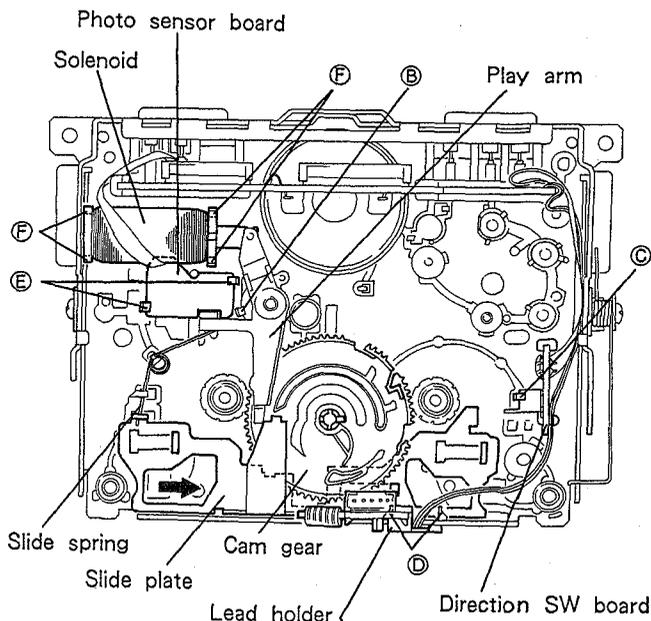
Removal of Play Arm, Slide Plate, Cam Gear and Solenoid
